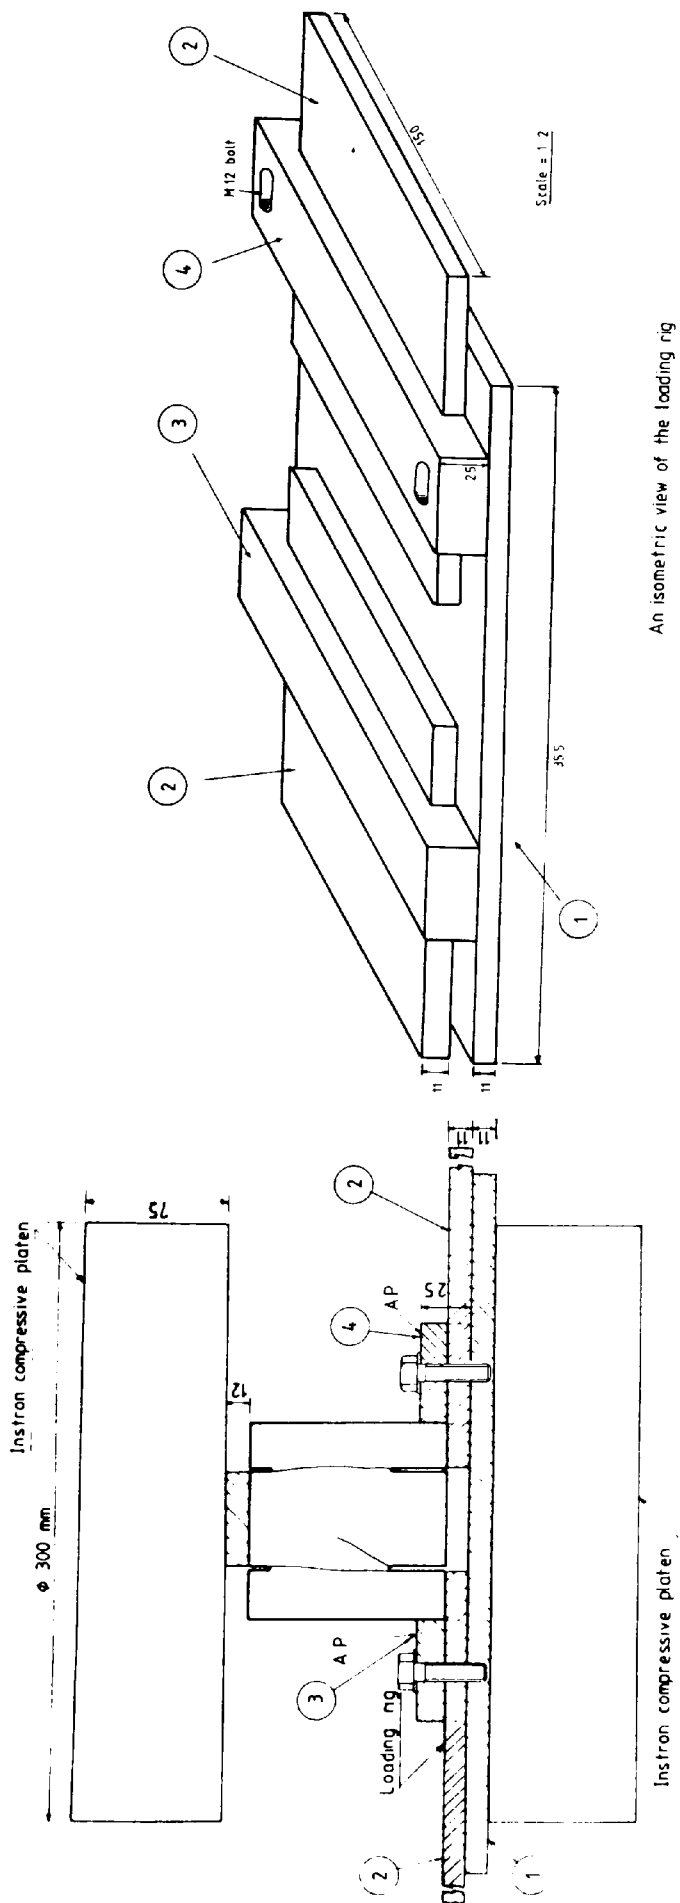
The INSTRON compressive platens and the load rig of the fracture test arrangement.
